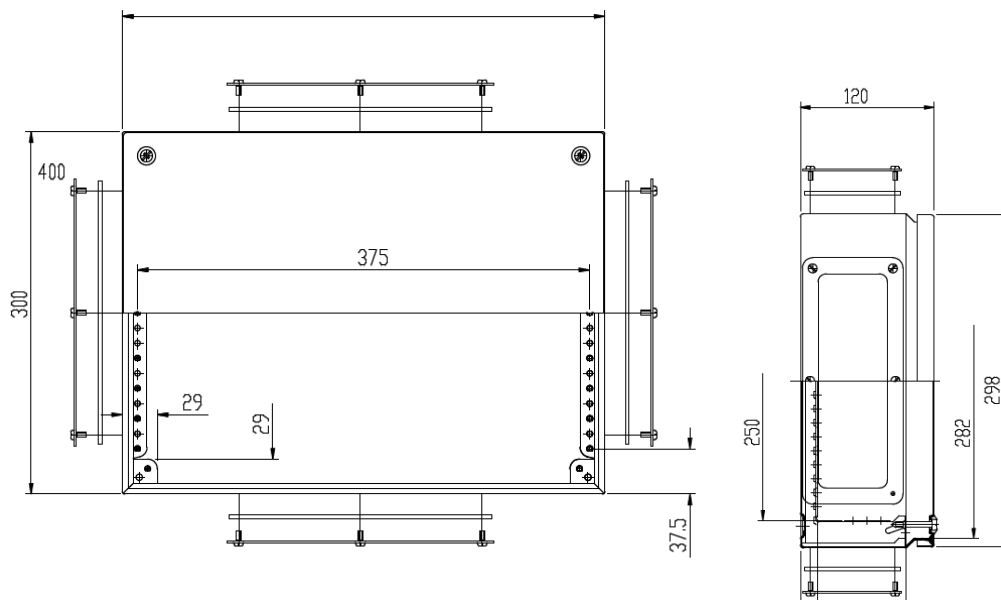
Enclosure Dimensions (mm): Outside, Depth
